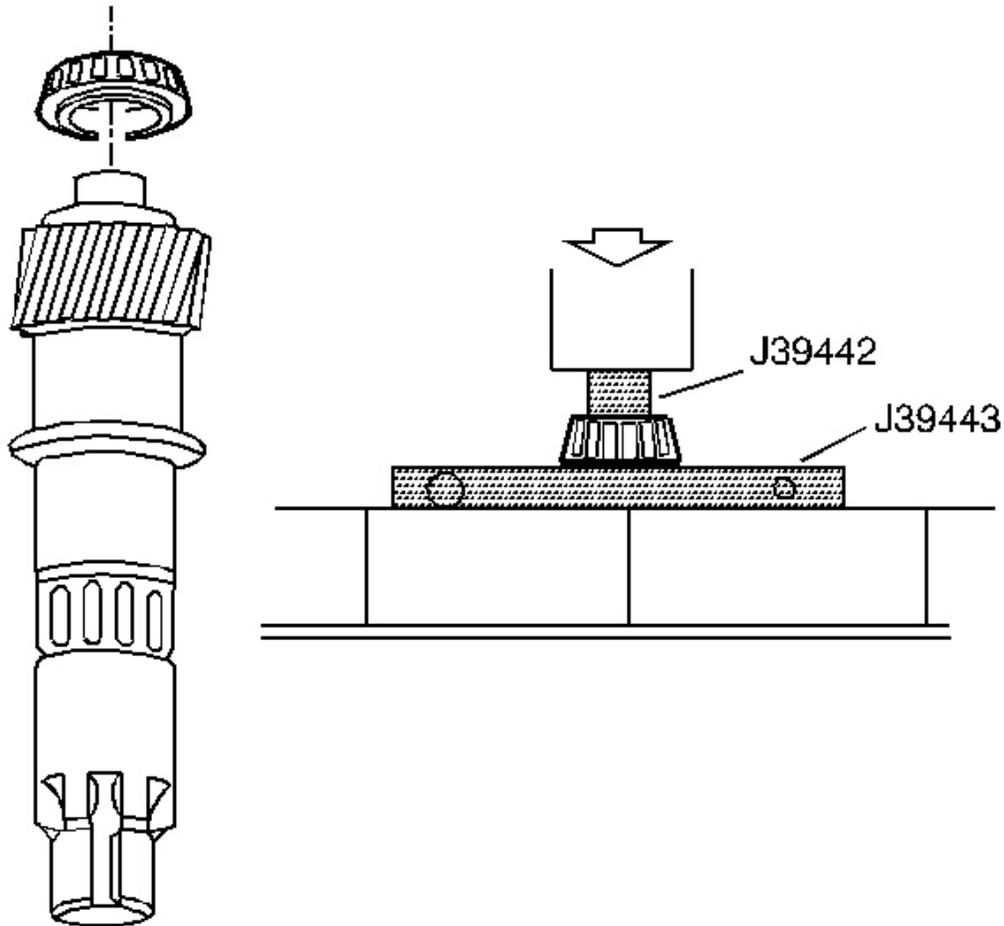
Removing Small Tapered Bearing Using J 39442 & J 39443
